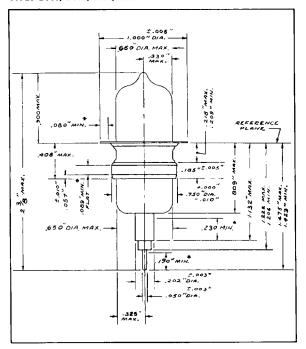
Outline drawing showing the dimensions that are necessary for designing covities. The dimensions are for the 2036, 2027, 5764, and 5765.
